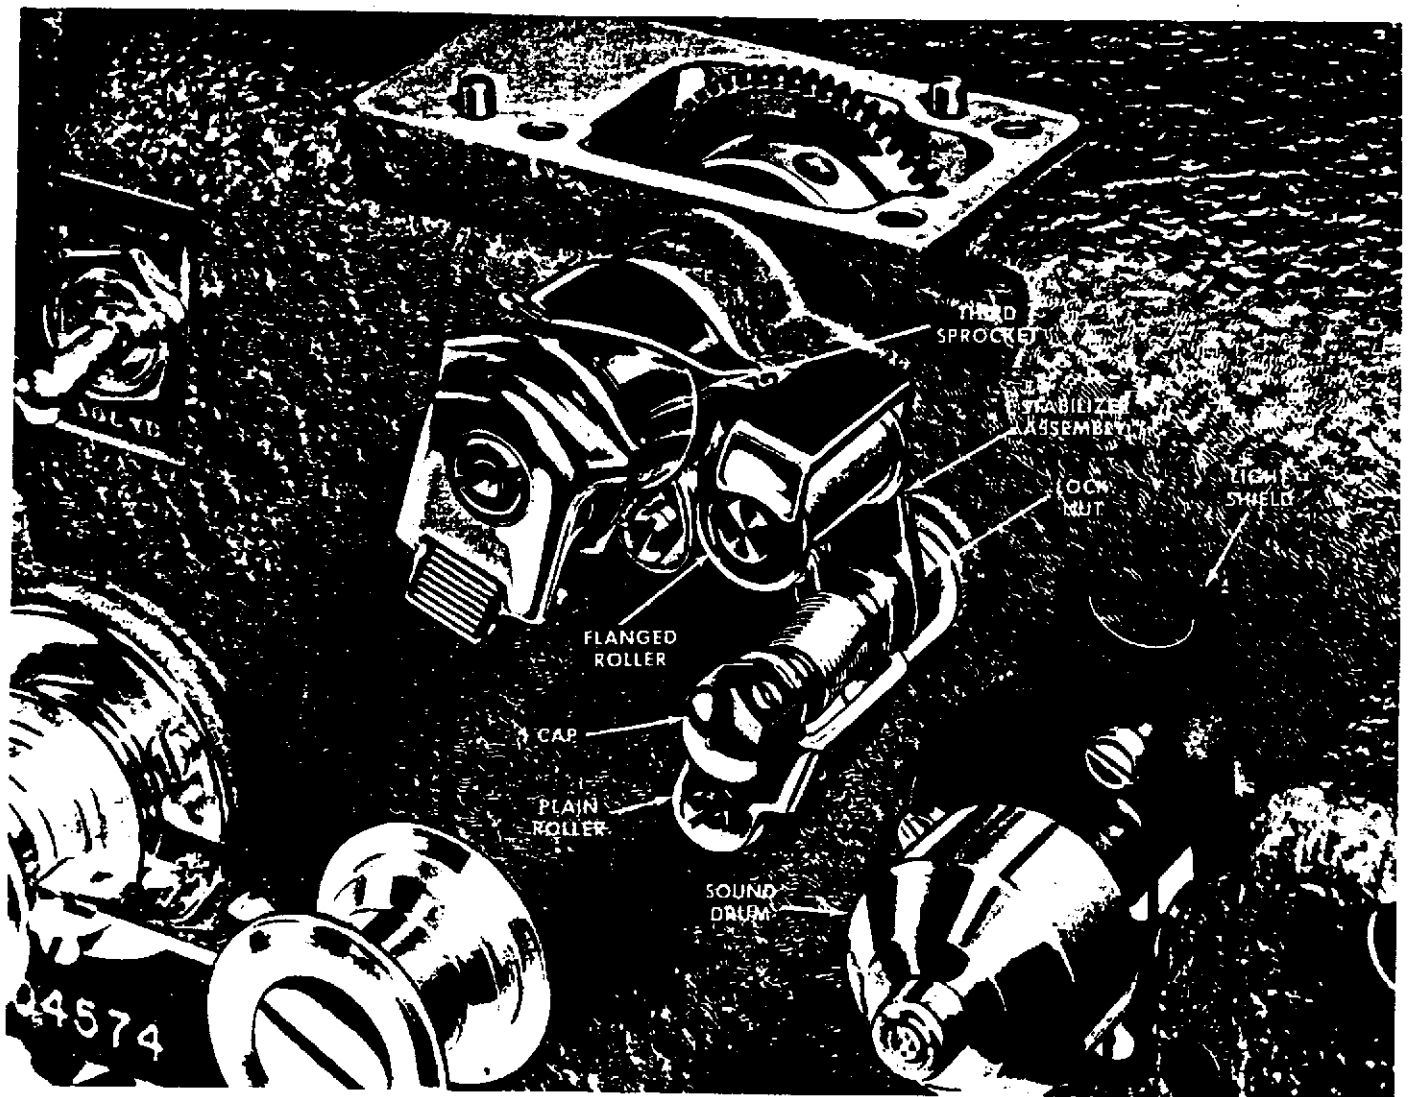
Figure AA. Stabilizer Assembly, Design 185 B and C Projectors
